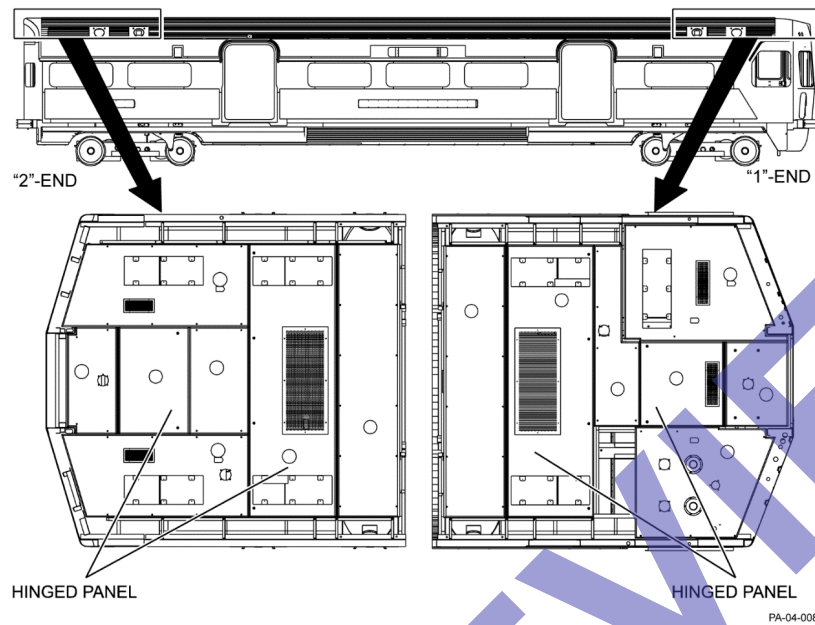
Hinged Ceiling Panels Layout on HRV –courtesy PATCO
